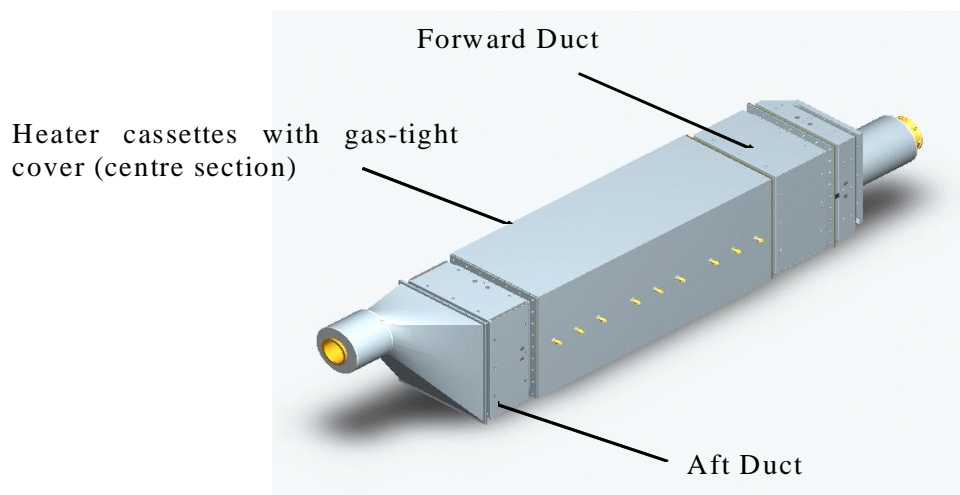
3-D view of the heater showing heater assembly (three heater cassettes are contained in the gas-tight centre cover).
